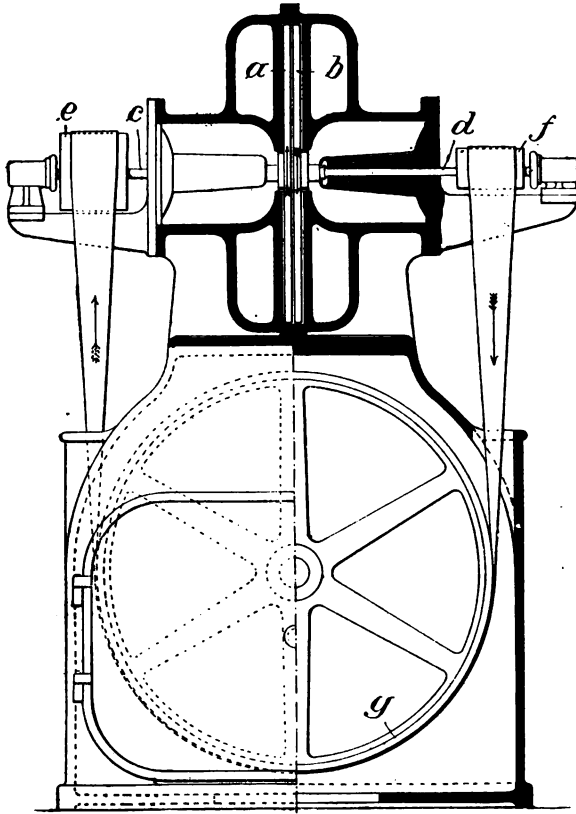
Seger Steam Turbine showing Belt-driving Arrangement.
